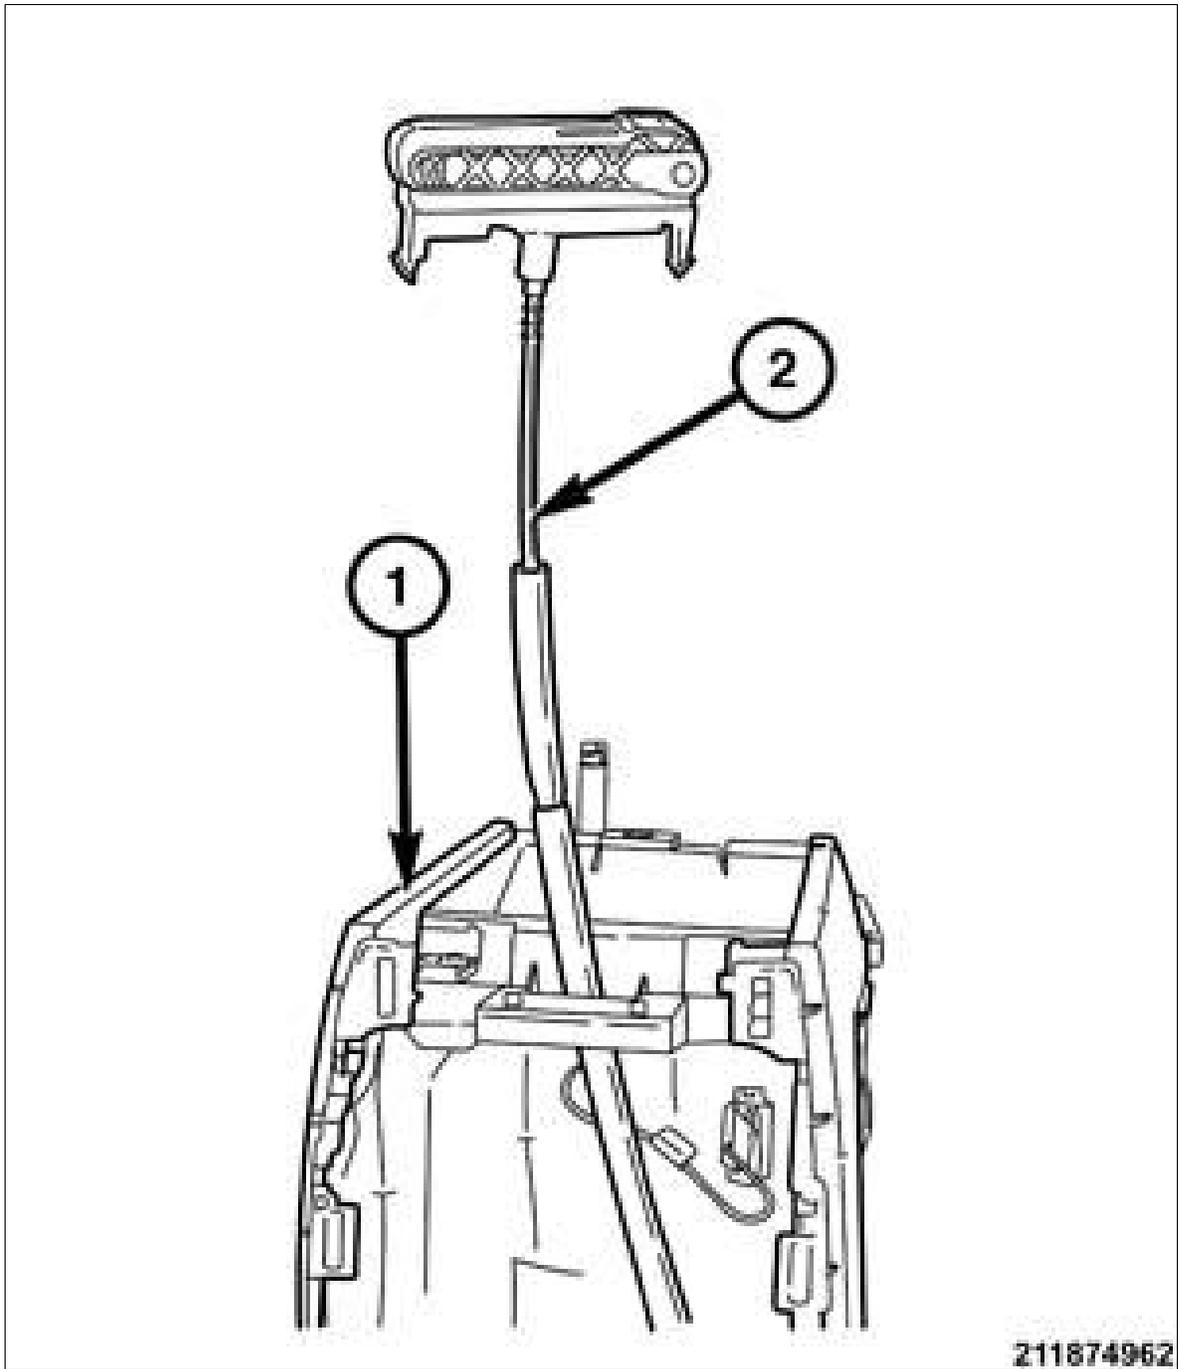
Clipping MPR Lever Into Place & Securing With 2 Screws
